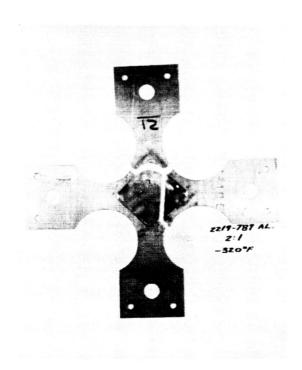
FAILED 1:1 BIAXIAL TEST SPECIMENS (WELDED AND UNWELDED CONDITION)
